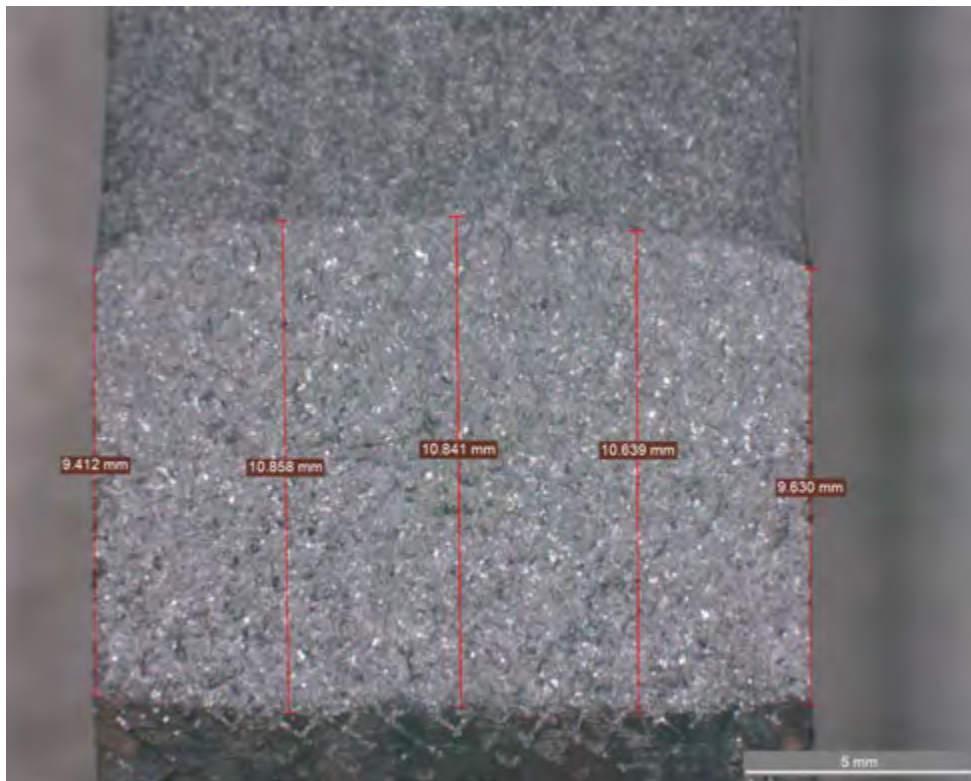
Crack length measurement of fracture surface of specimen EDGE – 3.
